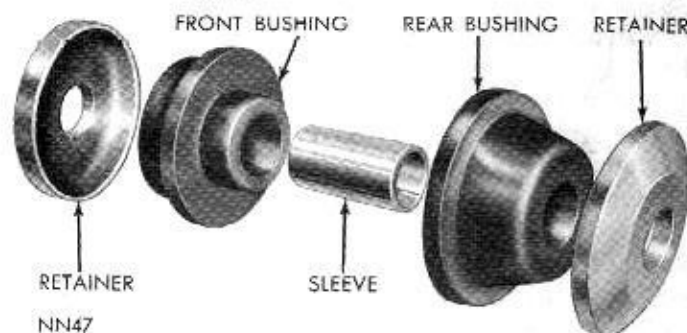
Strut Crossmember Bushings (Coronet-Charger)
